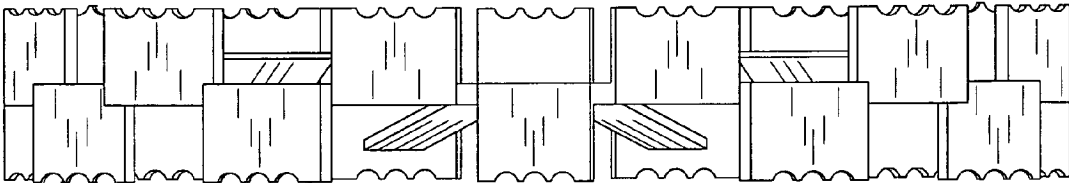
is a bottom plan view of a turbo pump dispersion blade showing my new design; and,
